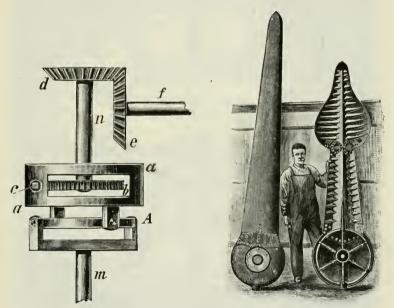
Universal joint and miter gear. FIG. 15.—The clock hands.
